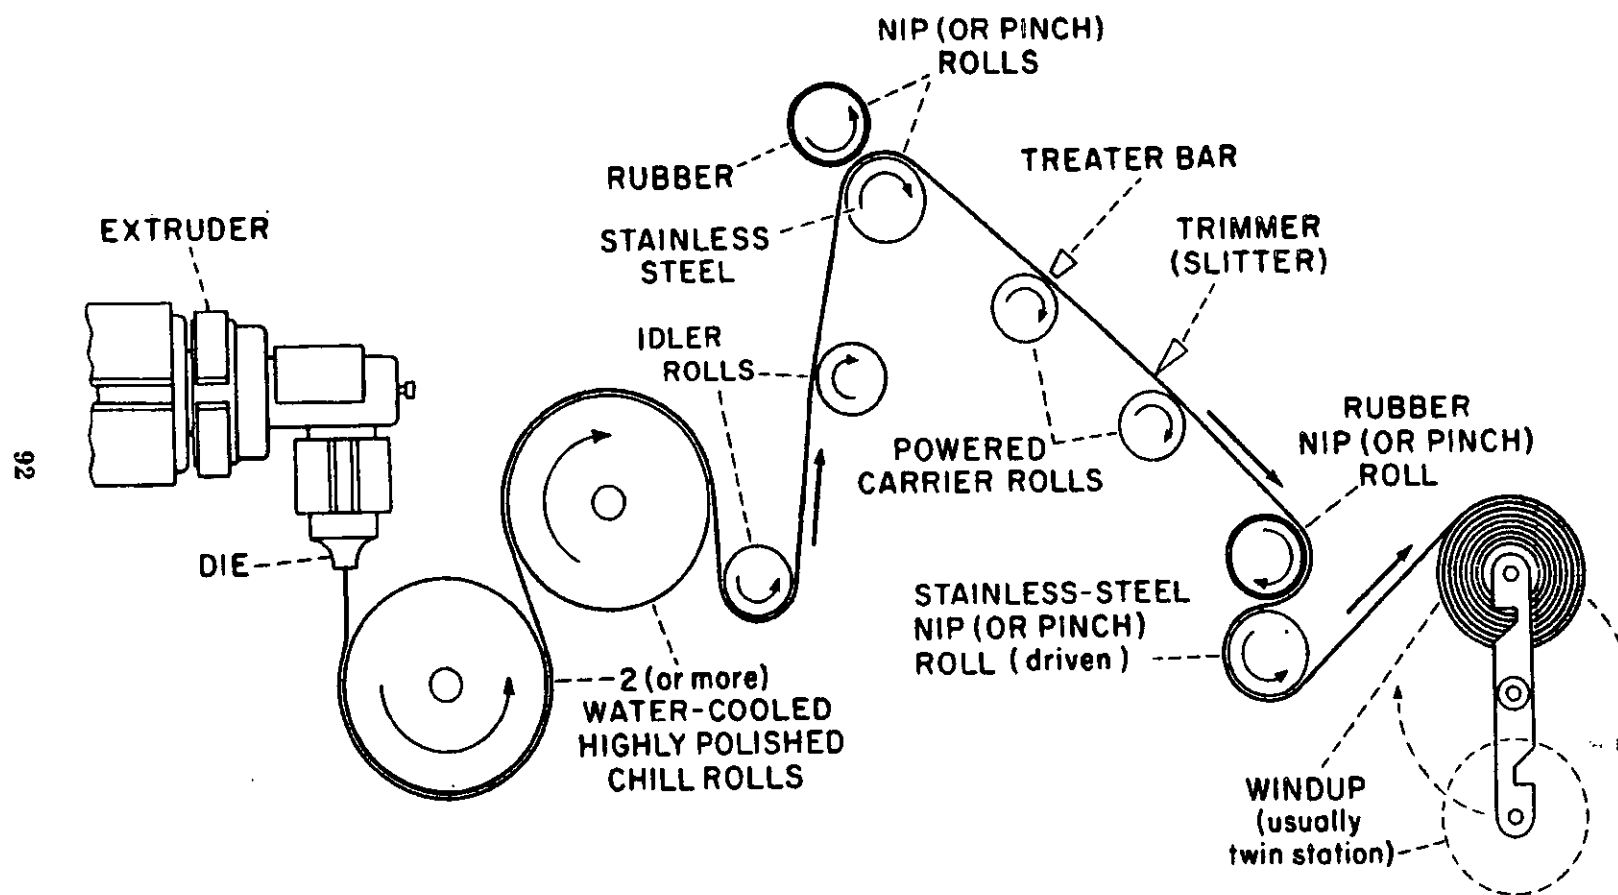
Schematic drawing of chill-roll film extrusion equipment.
